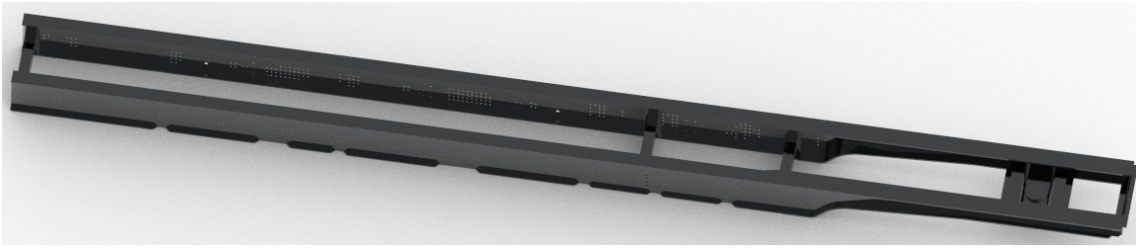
Assembly drawing of the current generation of the E-trailer
